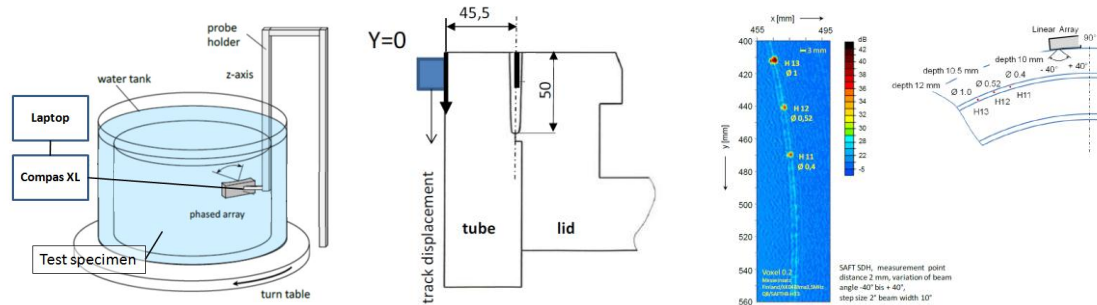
Measurement set up for PA-SAFT trials and copper weld positioning in phased array SAFT.
